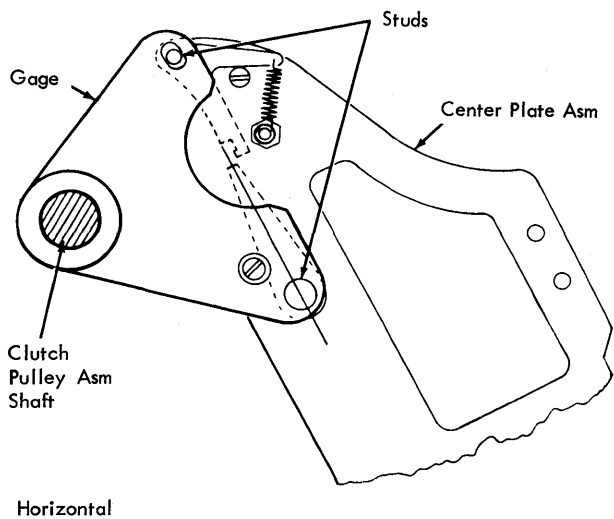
Read Clutch Magnet Assembly Adjustment (500 CPM)
